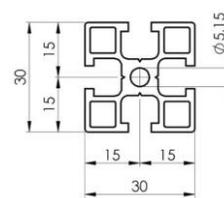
System 30, T-Slot Aluminium extrusion profile allows standard fasteners to be used when assembling and attaching to the Modular Rail System.
